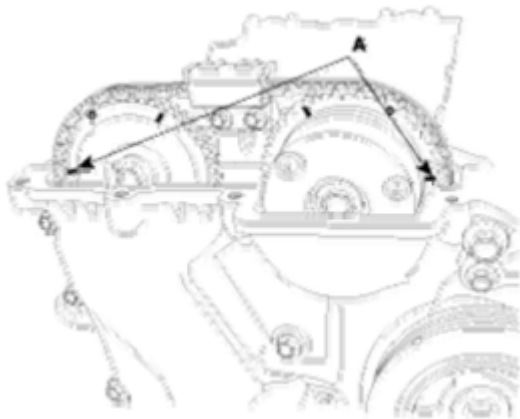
Identifying Camshaft Sprocket Timing Marks
